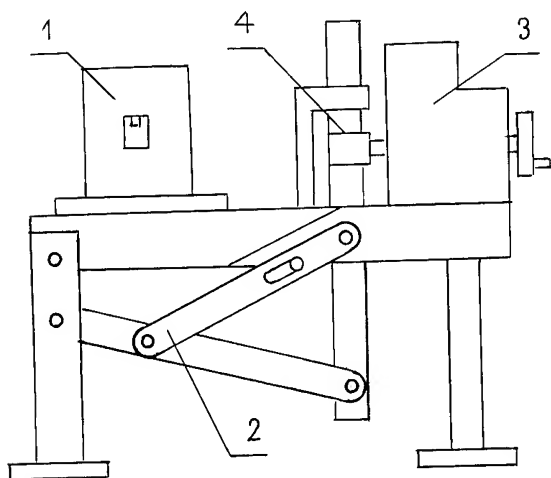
High pressure apparatus 1 – pressure chamber, 2 – lever mechanism, 3 – reduction gear and electromotor drive, 4 – worm-gear
